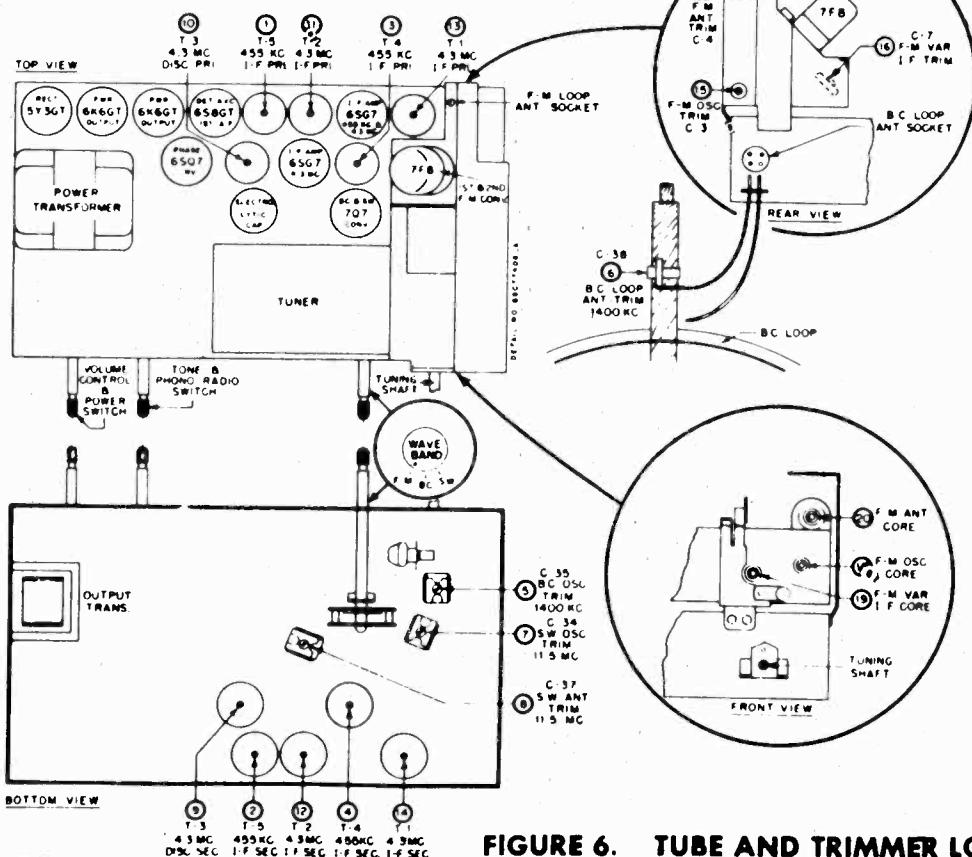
TUBE AND TRIMMER LOCATIONS
